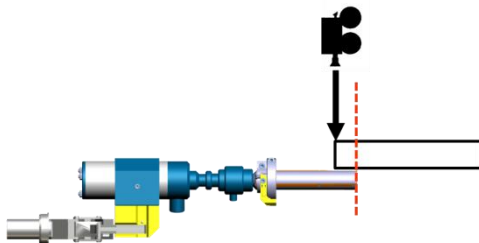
A fault insertion occurs when the tool is pushed more than one tool diameter (30 [mm]) under the tube.
